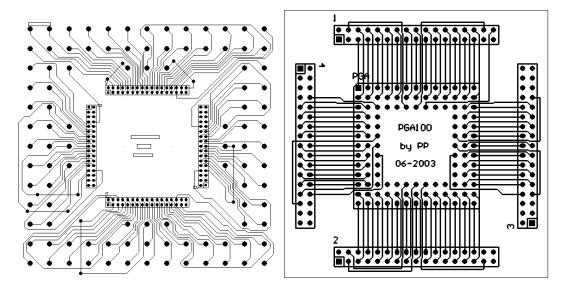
Connection boards: (a) base board, (b) doughter board
